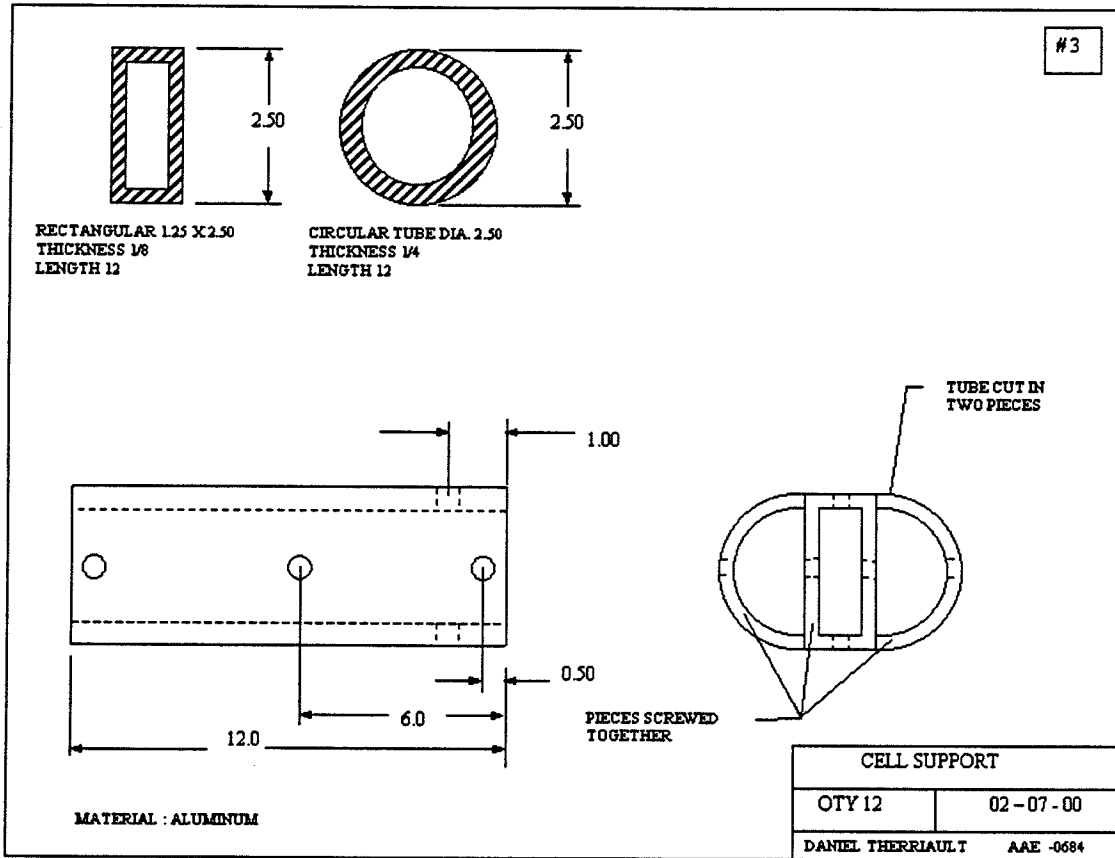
Engineering drawing of the inner cell support blocks used in the outer shell support tooling.
